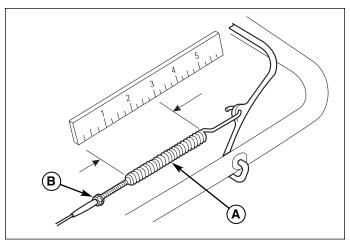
Auger Cable Adjustment - Disengaged A. Cable Spring
